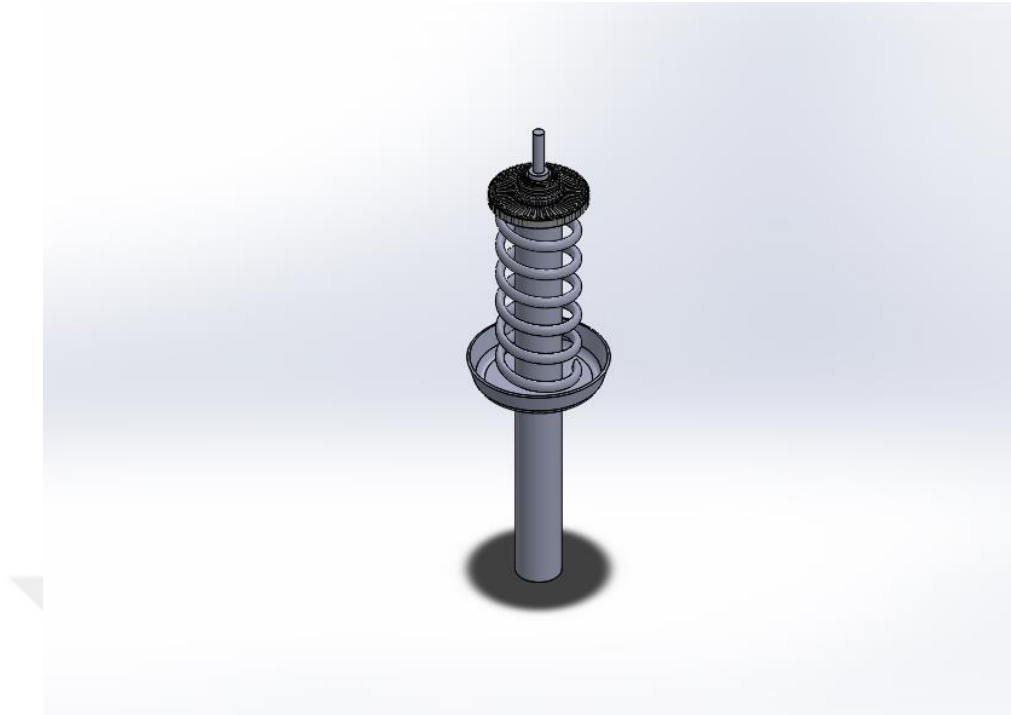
Isometric view of the MacPherson strut suspension system design
